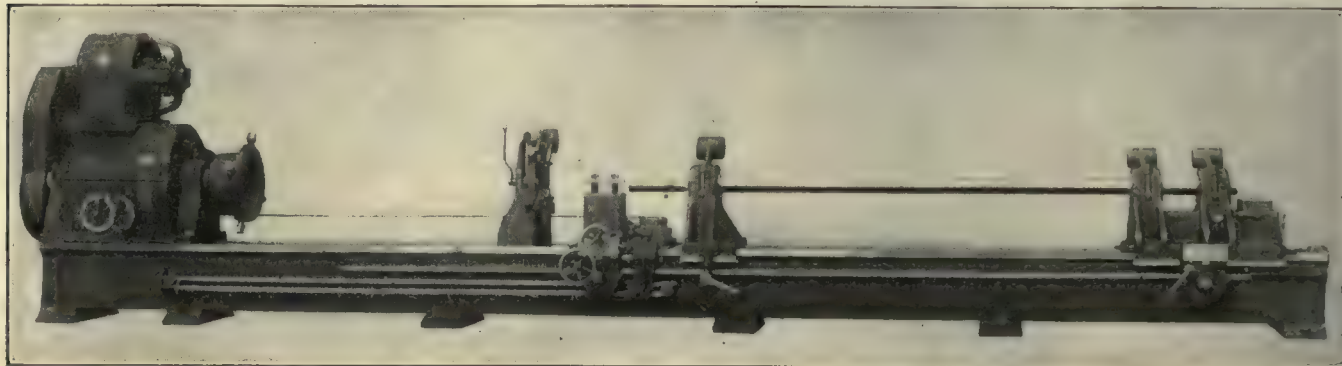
FRONT VIEW OF LEBLOND 38-IN. GUN-BORING LATHE
